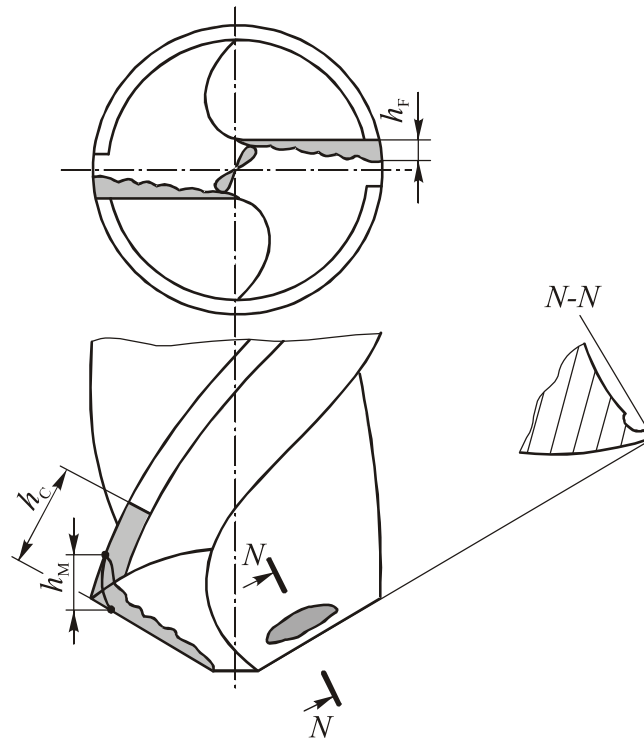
Wear on the rake and clearance surfaces of a twist drill
